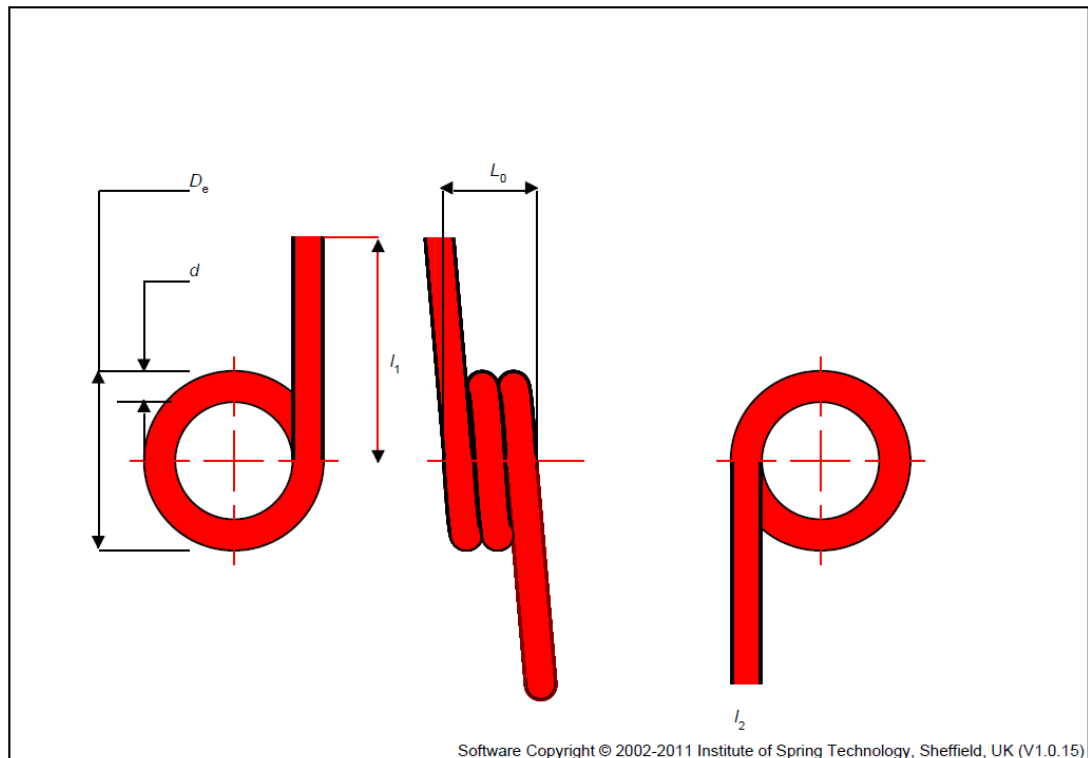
Spring drawing of the torsional springs provided by JB Springs Ltd.
